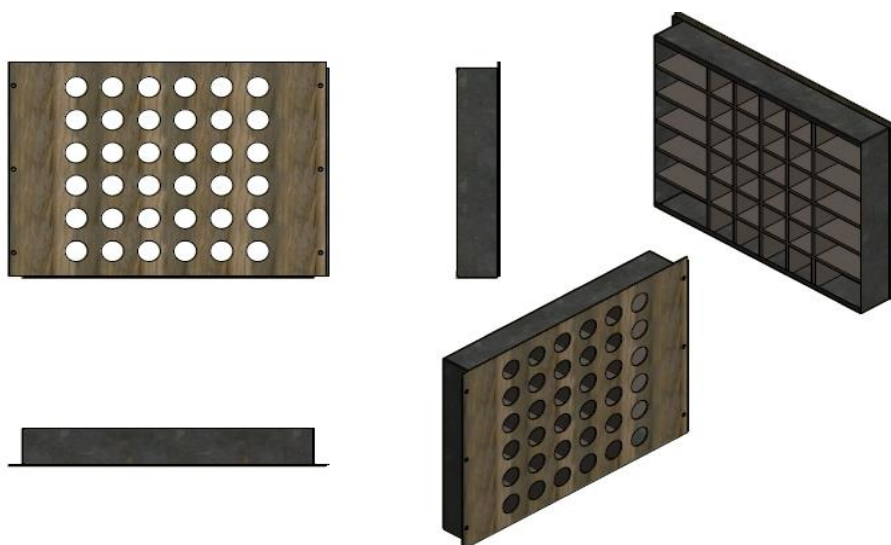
Heat exchanger box housing steel boxes, perforated plate and guide fins sub-assembly isometric drawing
